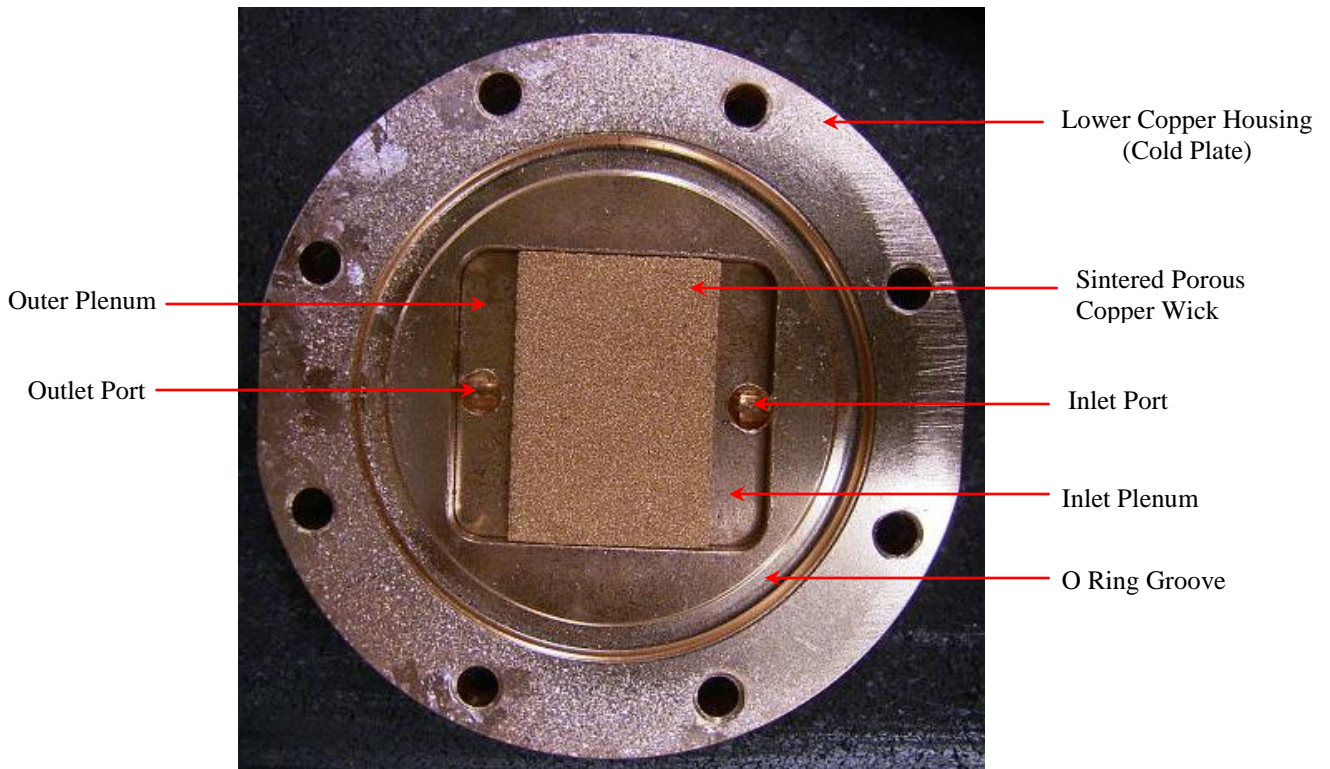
Picture of the cooling section showing the Porous Insert inside the machined rectangular channel
